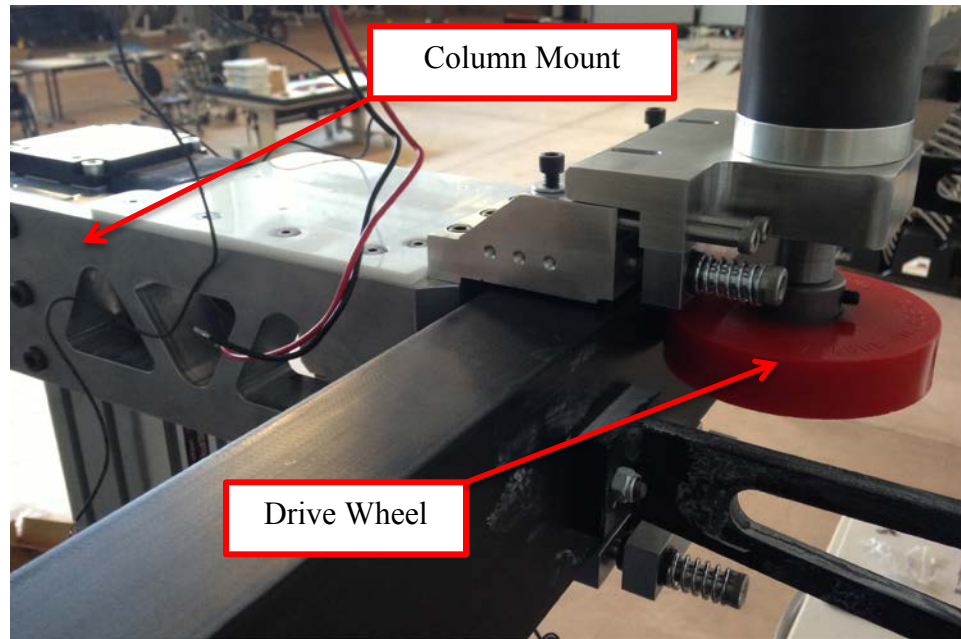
Final aluminum prototype drive carriage with motor assembly and vertical column
